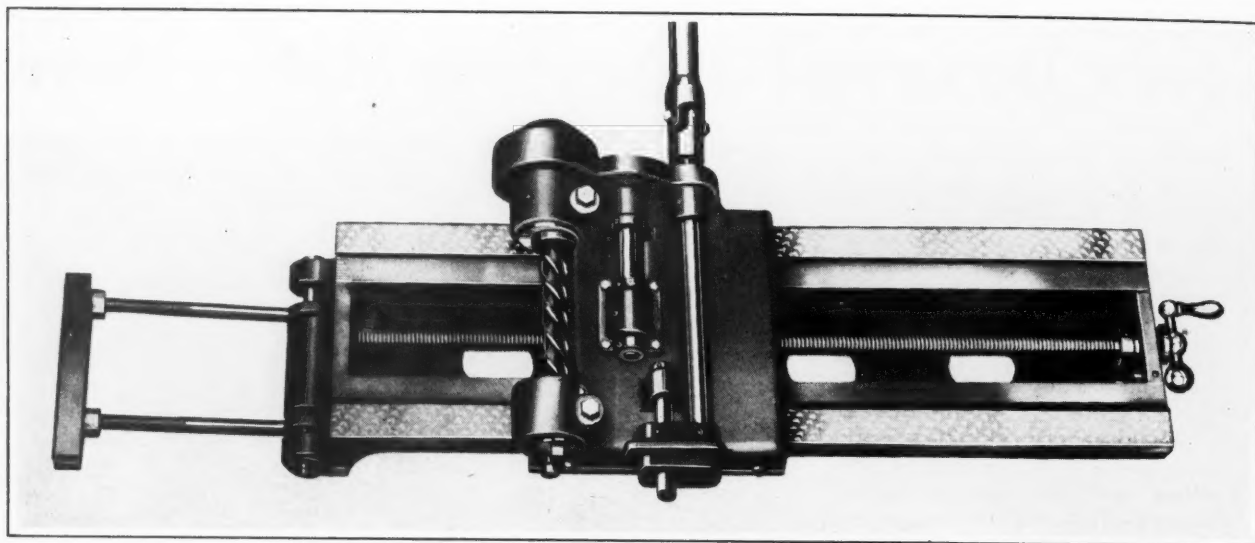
Portable Locomotive Frame Jaw Milling Machine
